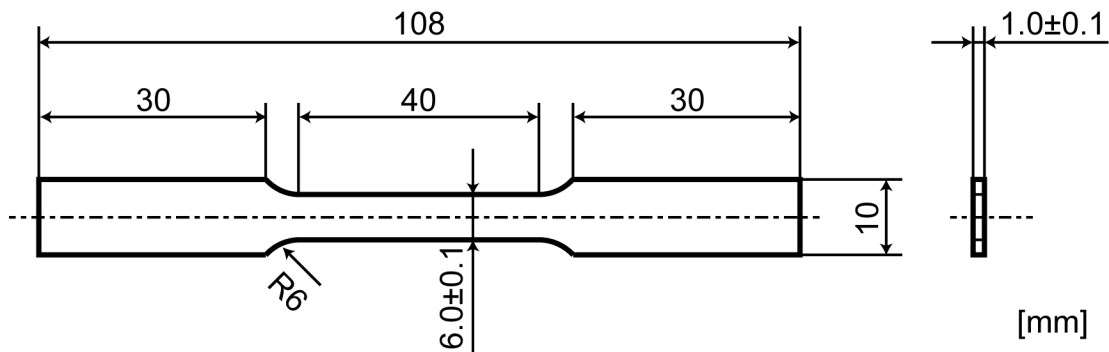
Dimensions of weld metal tensile specimen used to evaluate hydrogen charging on mechanical properties.
